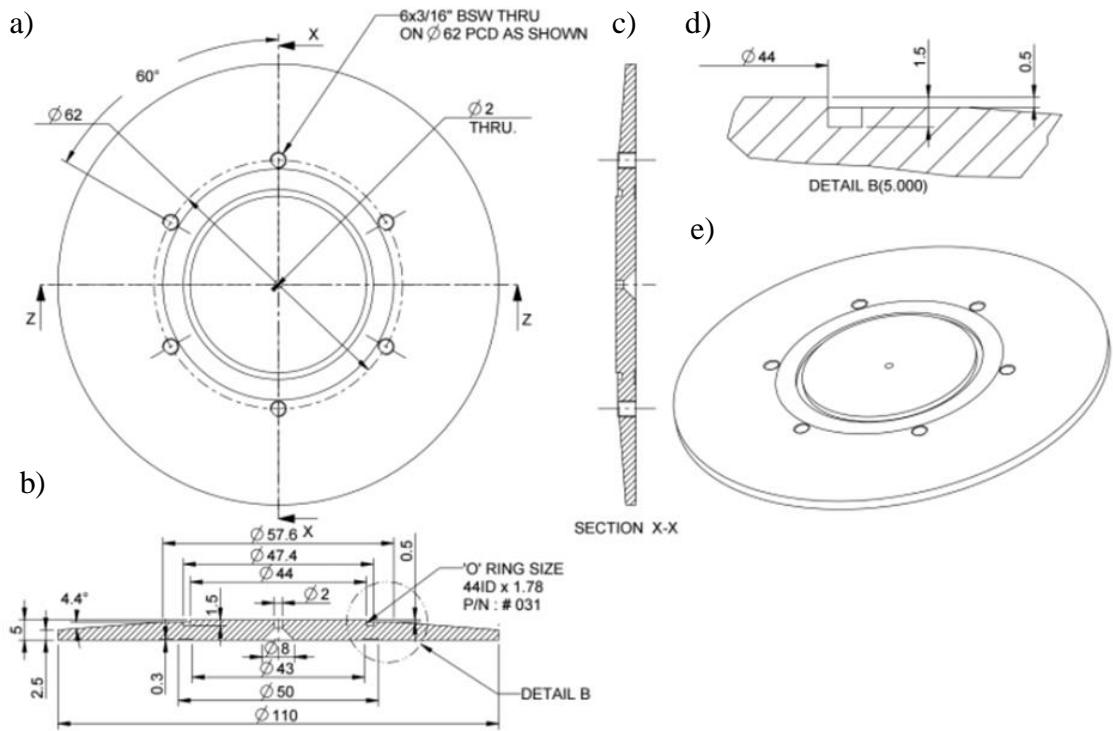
Technical drawing of the chuck-B with details of design (all dimensions are in mm) by PTC CREO software. (a) 2D top view. (b) 2D section (Z-Z) view. (c) 2D section (X-X) view. (d) 2D detail view to provide greater clarity about the region of circular groove. In Figure 5.4(b), the detail view border is displayed using dotted circle and annotated with letter 'B' to link the detail view with its parent view. (e) 3D view of chuck-B.
